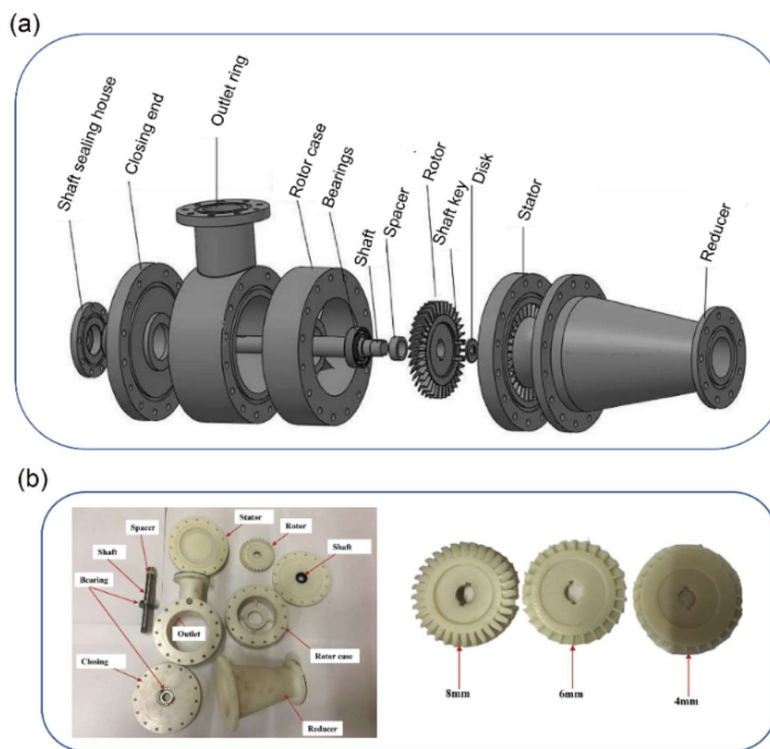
(a) Exploded schematic of micro-scale axial turbine and (b) left: fabricated all turbine parts and right: fabricated rotors with different blade heights [147]
